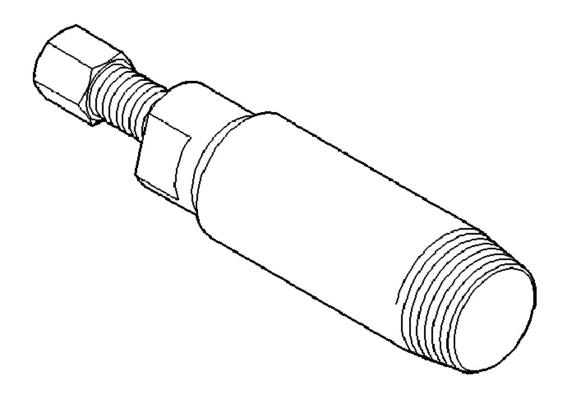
Front Crankshaft Seal Remover 6341A Courtesy of CHRYSLER LLC
